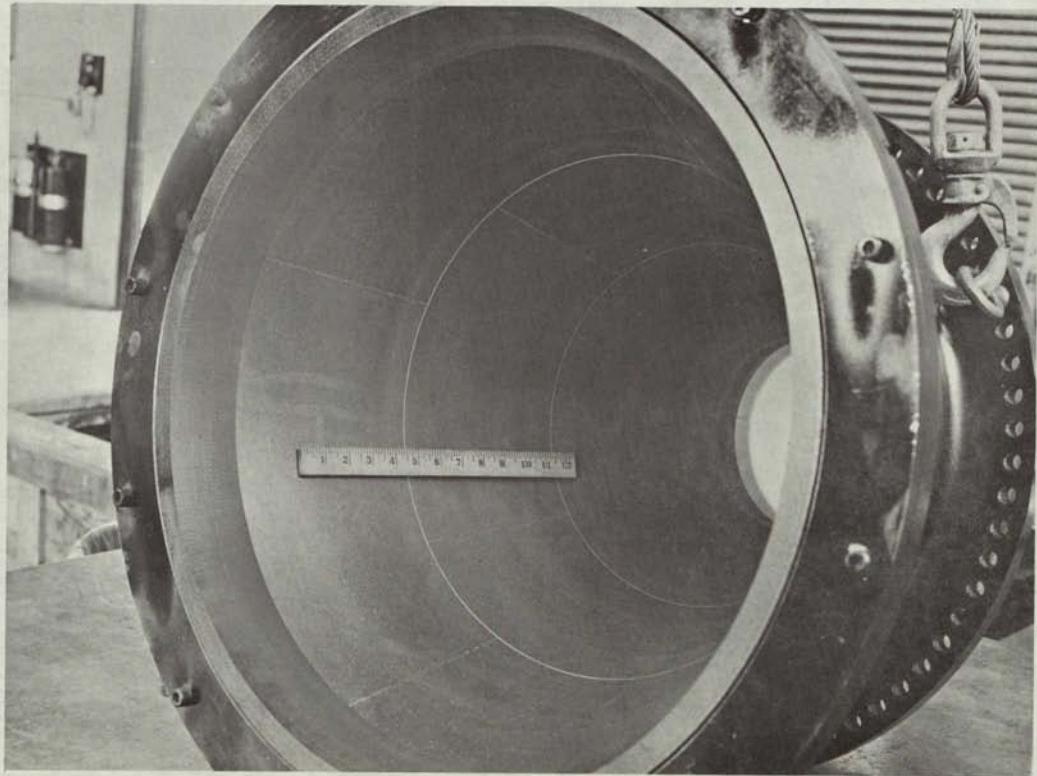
Nozzle No. 2 Installed Segmented Exit Cone
